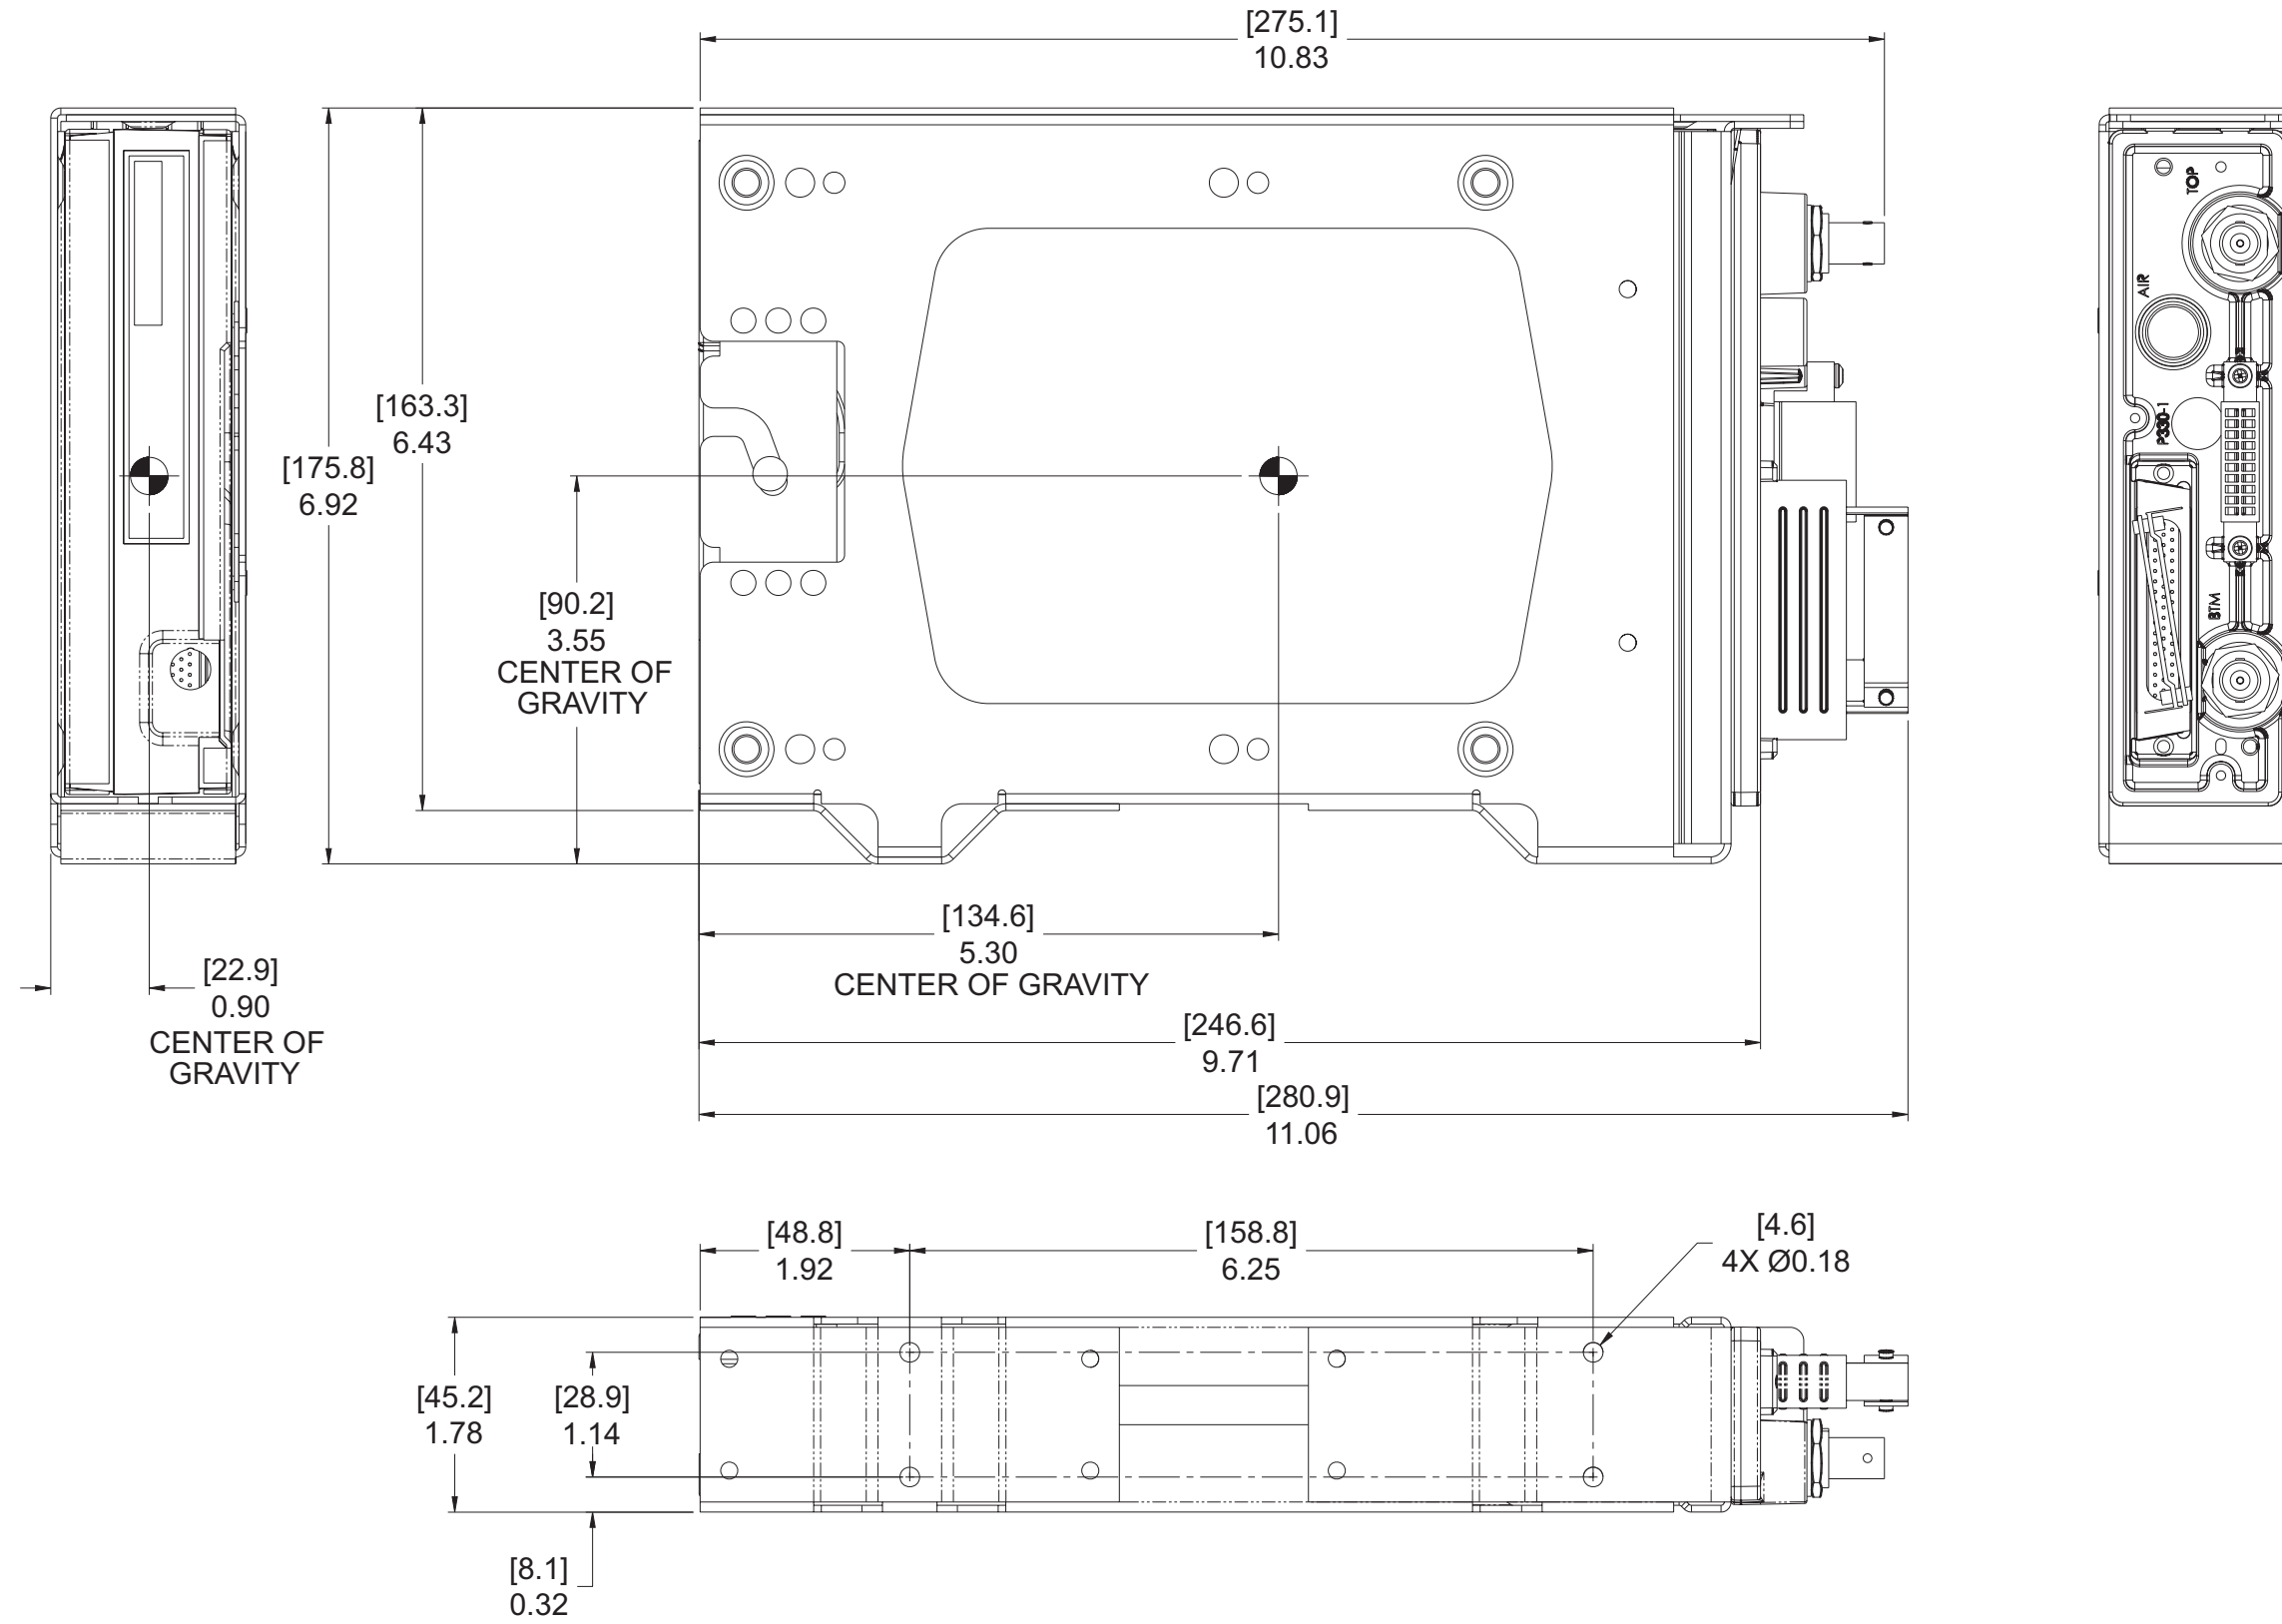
GTX 33 Stand-Alone Rack/Connector Assembly
